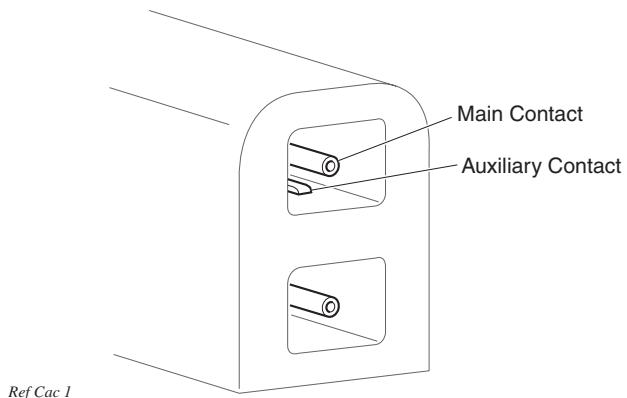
Cleaning Auxillary Contact in Charger Plug
